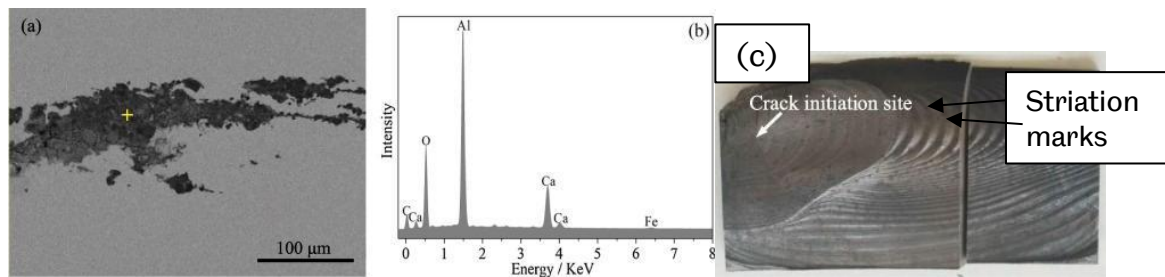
(a) Calcium aluminate inclusion and crack initiation from a scrapped railway wheel; (b) EDAX analysis of inclusion; (c) Fracture surface (Zeng *et al.*, 2020)
